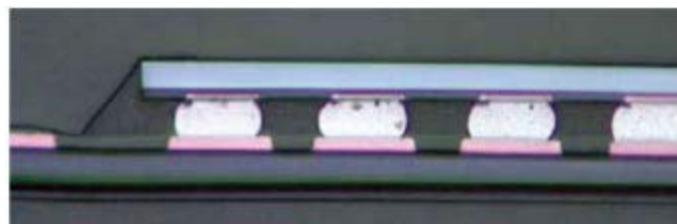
50- μm -thick Die Flip Chip Bonded with Sn/Pb Solder Bumps
